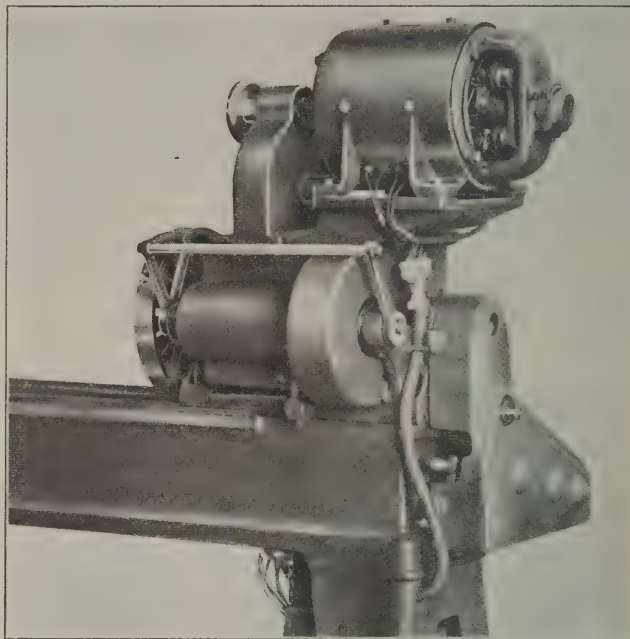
Rear View showing Headstock End of Motor-driven Lathe
